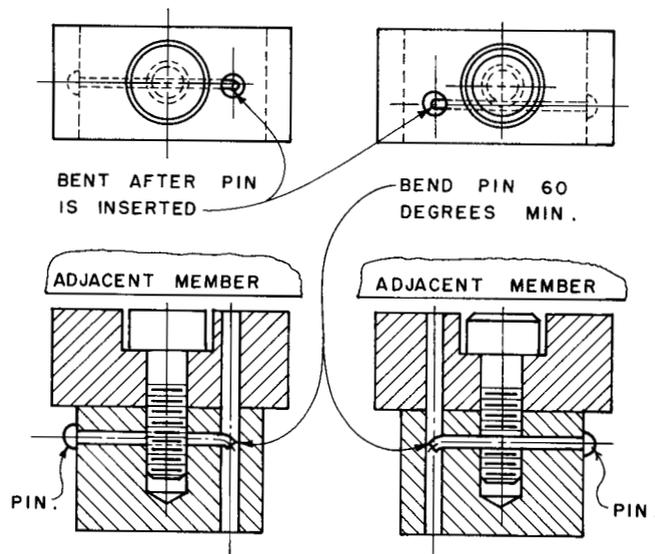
Pin With Recessed Head Cap Screw Used As Class-B Locking Device.
